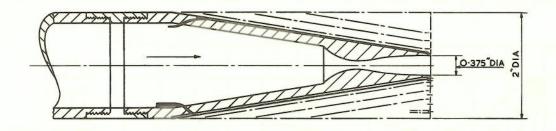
CONICAL BODY - JET TO BASE DIAMETER TESTS
